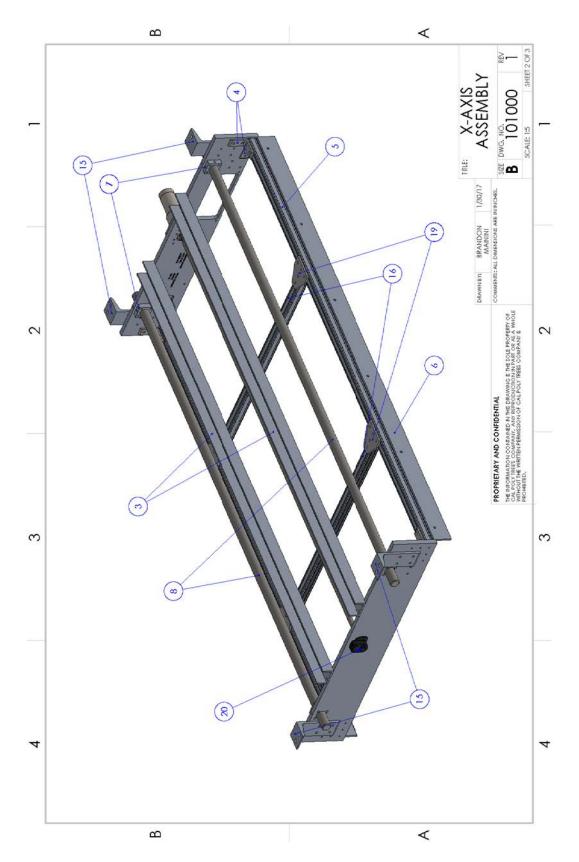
X-Axis Assembly Drawing Sheet 2 of 3
